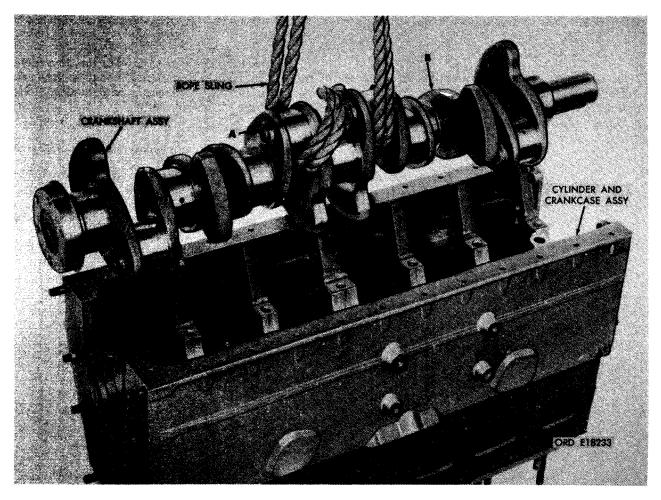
REMOVING OR INSTALLING CRANKSHAFT ASSEMBLY.
